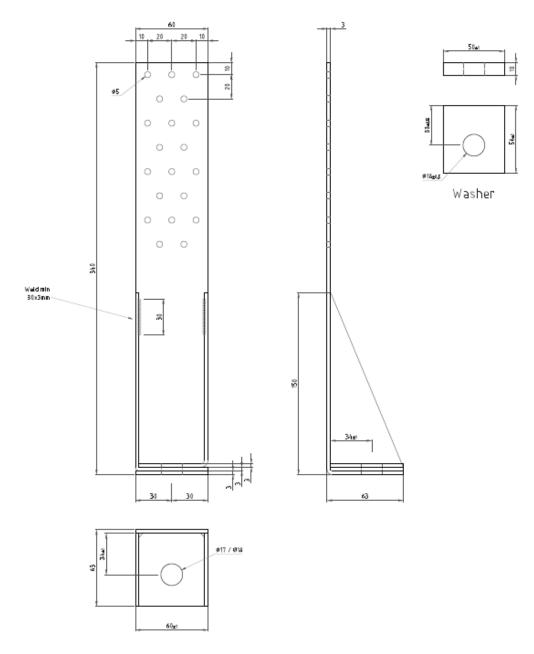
Dimensions of type WHT340 (drawing with washer 56x50x10)
